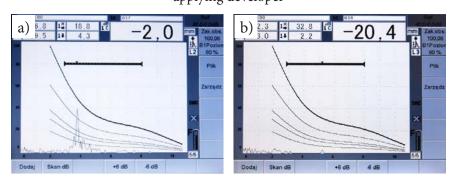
Example of ultrasonic examination of an FSW joint made of a 6082 grade aluminium alloy, a) with a deliberately introduced imperfection having a diameter 3 mm, located in the middle of a weld, b) a properly made joint free from imperfections
